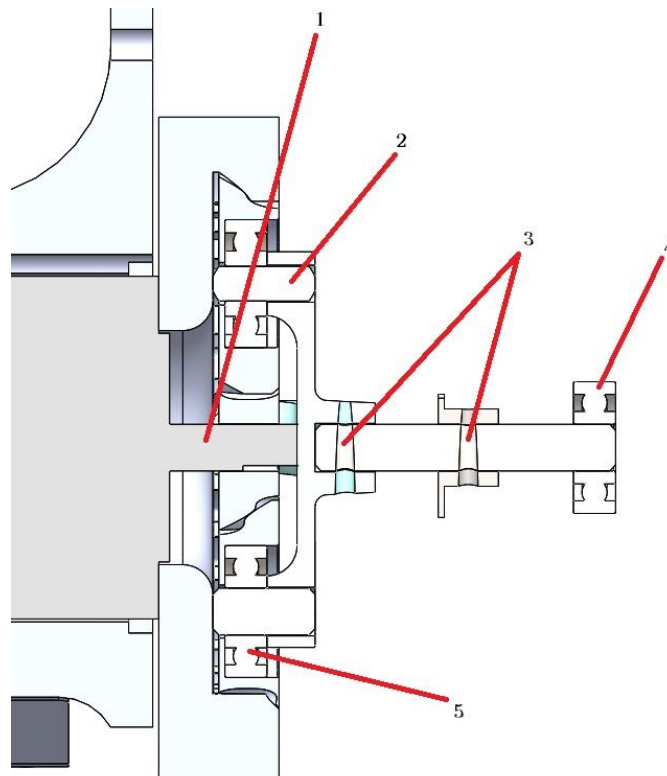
Cross-section of the gearbox, showing inner details. 1) The NEMA 23 motor and its shaft, 2) The pins that connect the planetary gears to the carrier, 3) Pins for torque transmission between shaft and attachments, 4) Locating bearing, 5) bearing for smooth rotation of the carrier.
